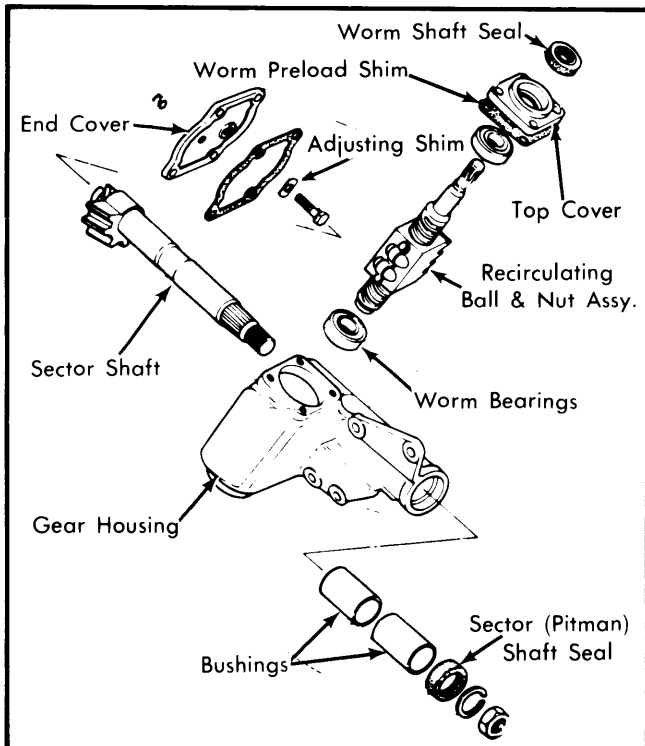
Exploded View of Recirculating Ball Steering Gear Assembly
